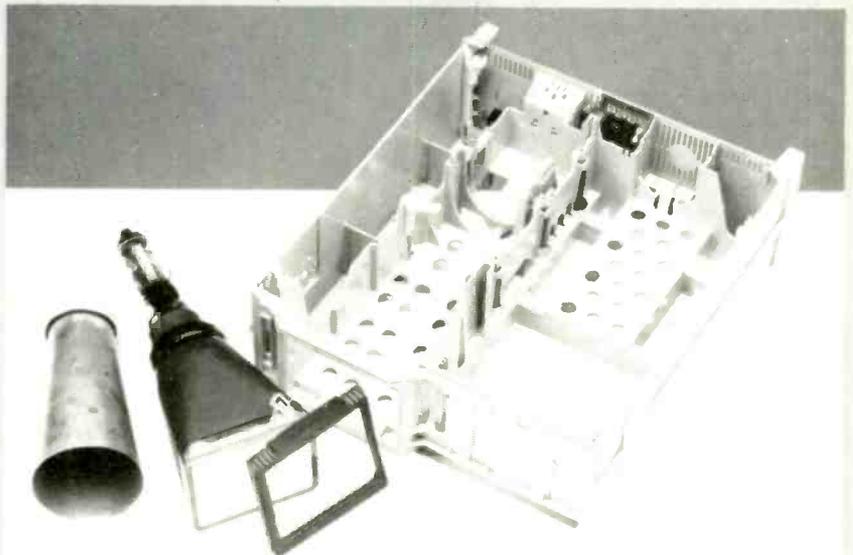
The PM3350's chassis is actually a one-piece injection-moulded frame made from a plastic 'alloy' of polycarbonate and ABS. The frame incorporates all 'click-fit' mountings and stops for p.c.bs and assemblies.
